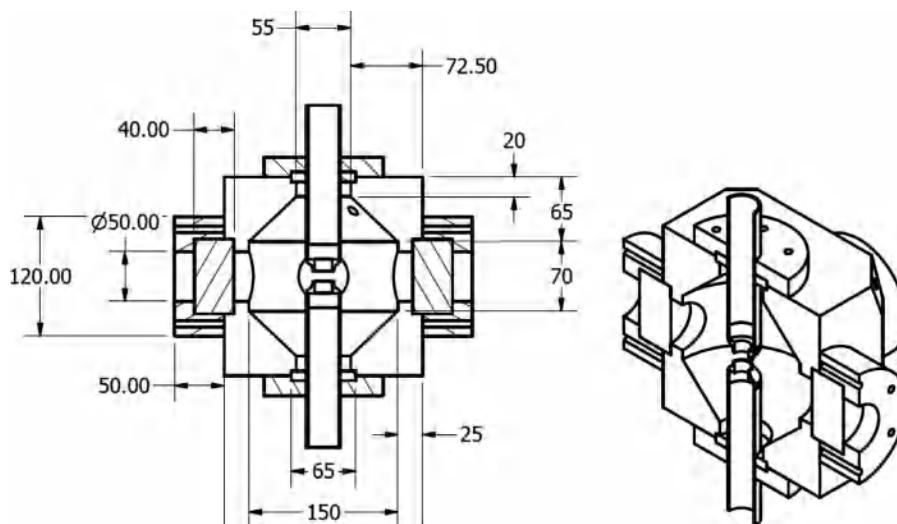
Cross-sectional and iso-metric views of the high-pressure chamber, with key dimensions, in mm.
